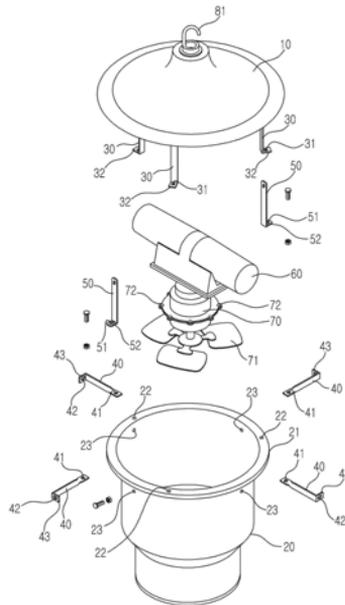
shows an exploded perspective view of the apparatus for capturing the insects in Fig. 1.
